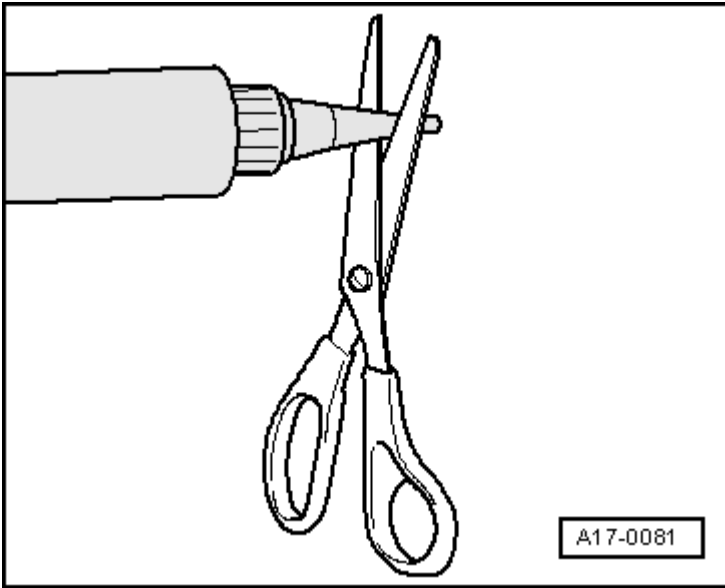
Identifying Scissors To Cut Tube Nozzle At Front Marking (Nozzle Diameter Approx. 3 Mm)
